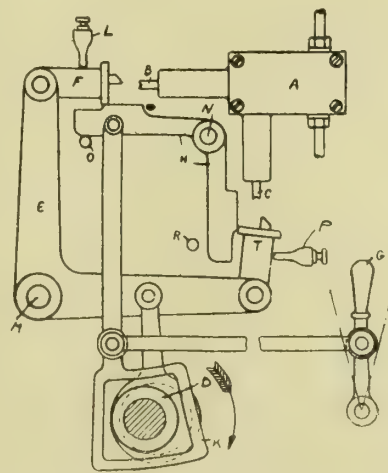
ARRANGEMENT FOR REVERSING THE BOLINDER OIL ENGINE.
